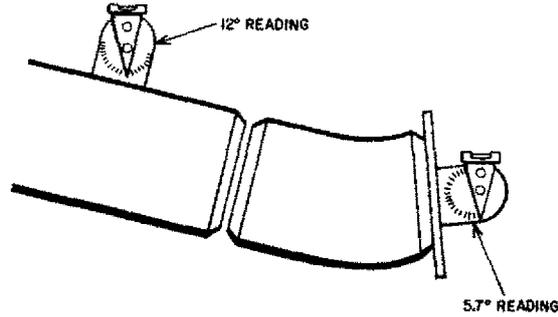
Method of checking the alignment of a 45-degree elbow with a protractor level when the pipe is not perfectly level.
